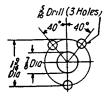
Drilling Plan for Type W Instrument and Control Switches
